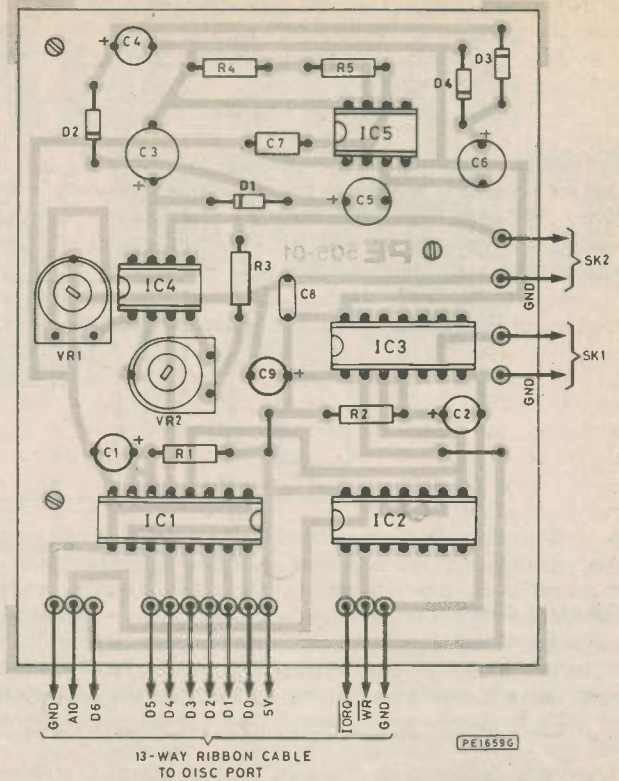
P.c.b. design and component layout of the Amstrad Sequencer
